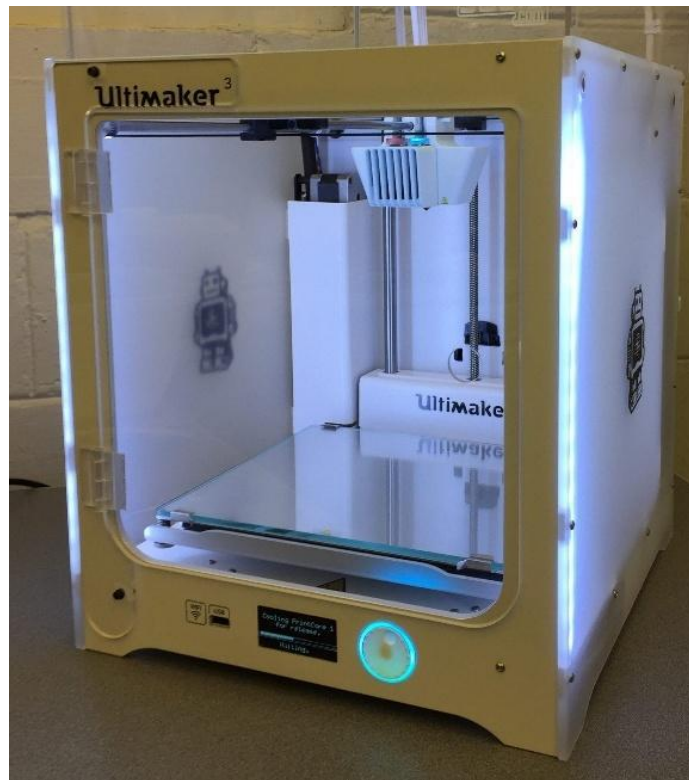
Ultimaker 3 Desktop FDM 3D Printer
